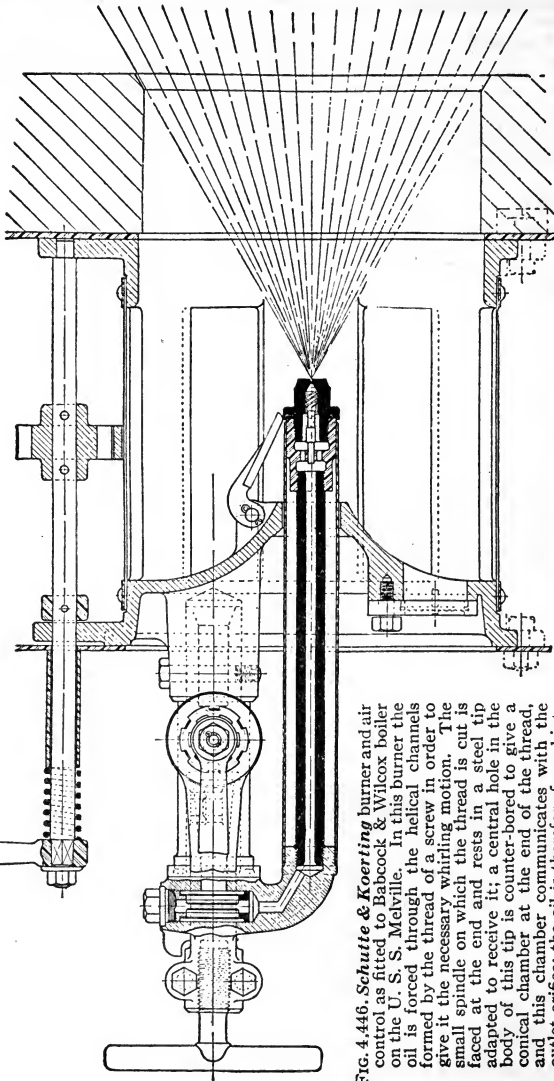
Schutte & Koerting* burner and air control as fitted to Babcock & Wilcox boiler on the U. S. S. Melville. In this burner the oil is forced through the helical channels formed by the thread of a screw in order to give it the necessary whirling motion. The small spindle on which the thread is cut is faced at the end and rests in a steel tip adapted to receive it; a central hole in the body of this tip is counter-bored to give a conical chamber at the end of the thread, and this chamber communicates with the outlet orifice; the oil is therefore forced into the small conical chamber with the rotary motion due to the action of the thread. The end of the spindle opposite the helical thread is squared in section and fits into a square hole in the nozzle of the burner, which prevents the spindle rotating when in operation. The air admission chamber is cylindrical in shape and is provided with longitudinal openings parallel with the axis of the burner, which admit the air for combustion. These openings are covered by an adjustable sheet iron cylinder, which fits on the outside, and the air is controlled by rotating this cover. The air is not given a whirling motion. In order to obtain the best mixtures and prevent pulsations, a high air pressure is usually carried and the air forced through restricted openings at high velocity.
